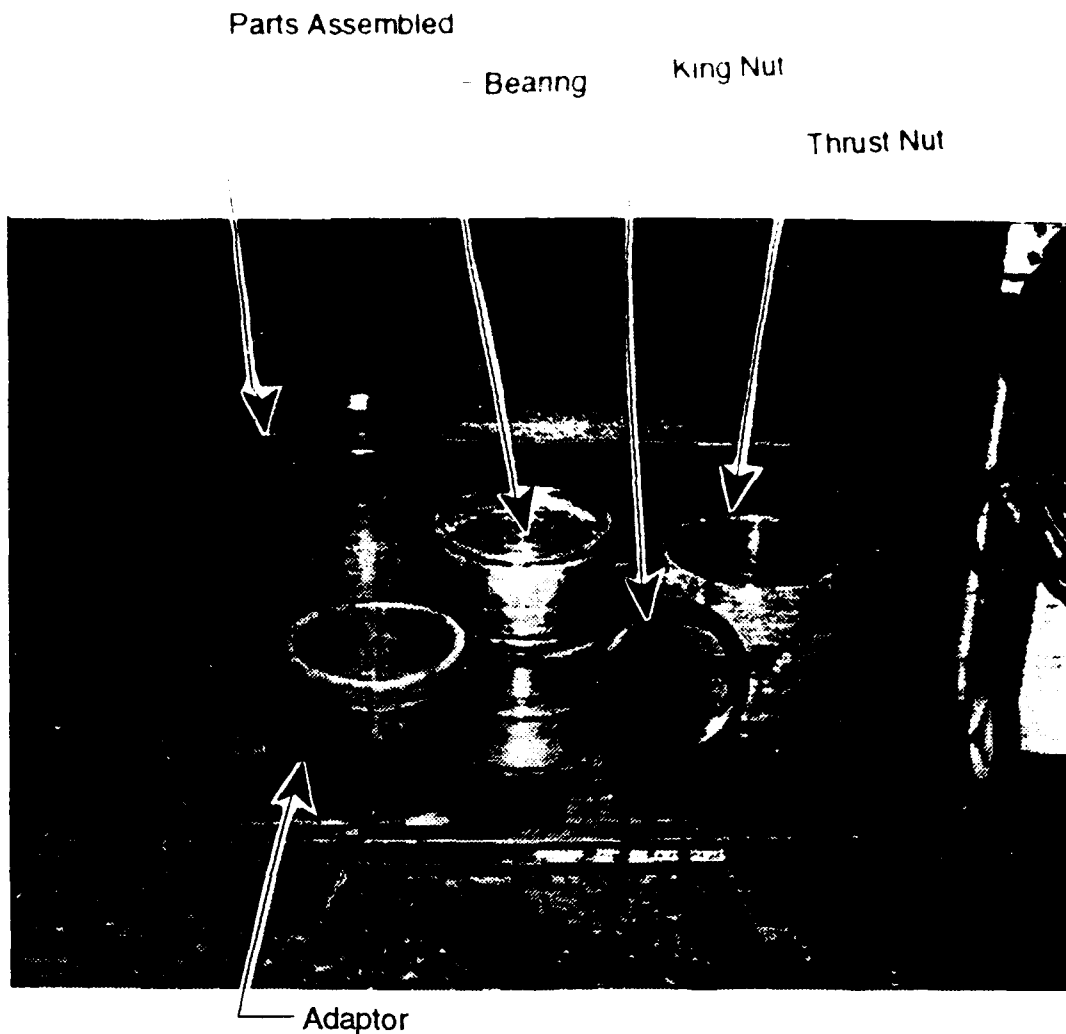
Parts connecting the piston to the gun tube at the piston and gun tube's front contact location.
